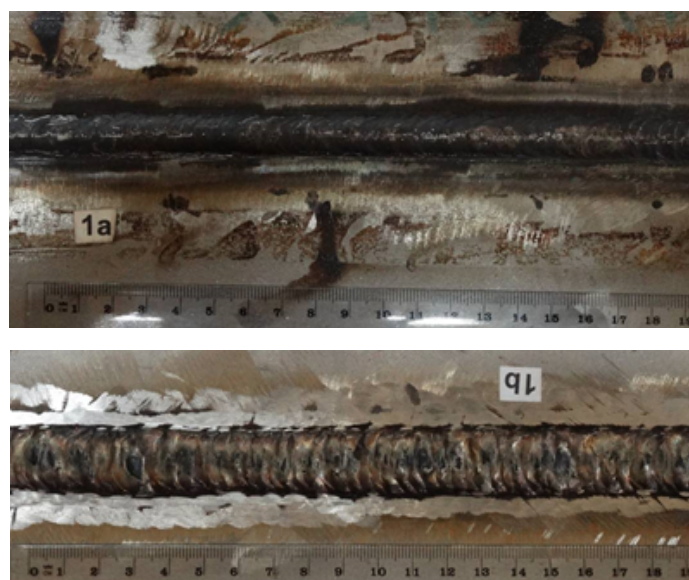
Welded joint: a) weld root and b) weld face
